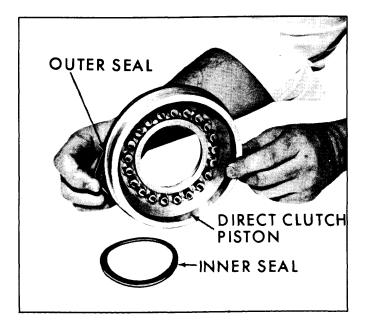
Removing Direct Clutch Inner and Outer Seals
